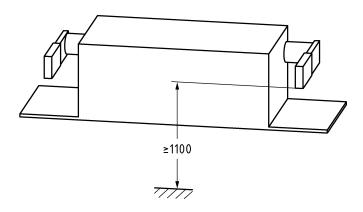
Prevention of defeating with one hand and other parts of the body
